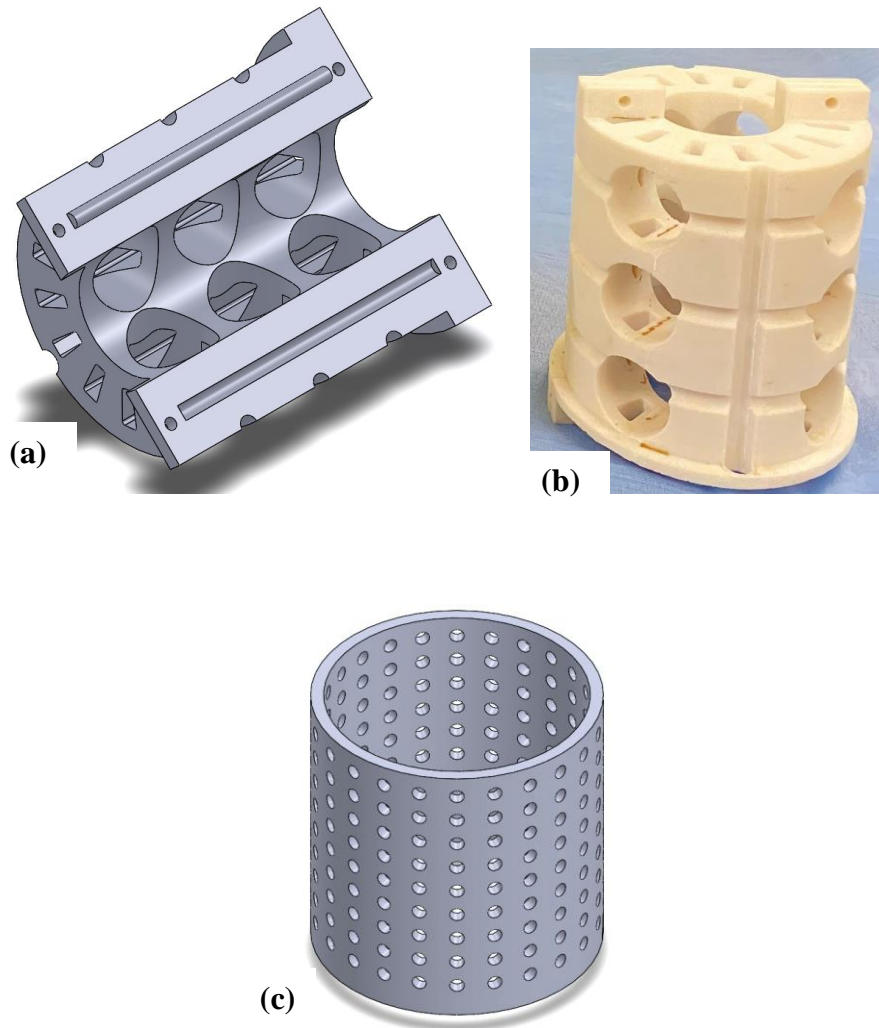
Excitation system holder: (a) Core holder 3D drawing, (b) 3D printed plastic holder, (c) Surrounding ring.
